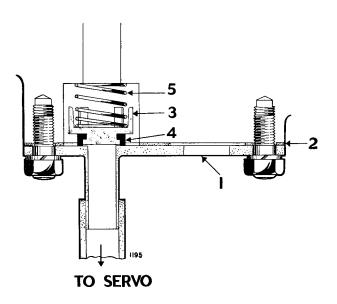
Sectioned view of the 3.4 litre vacuum check valve.
